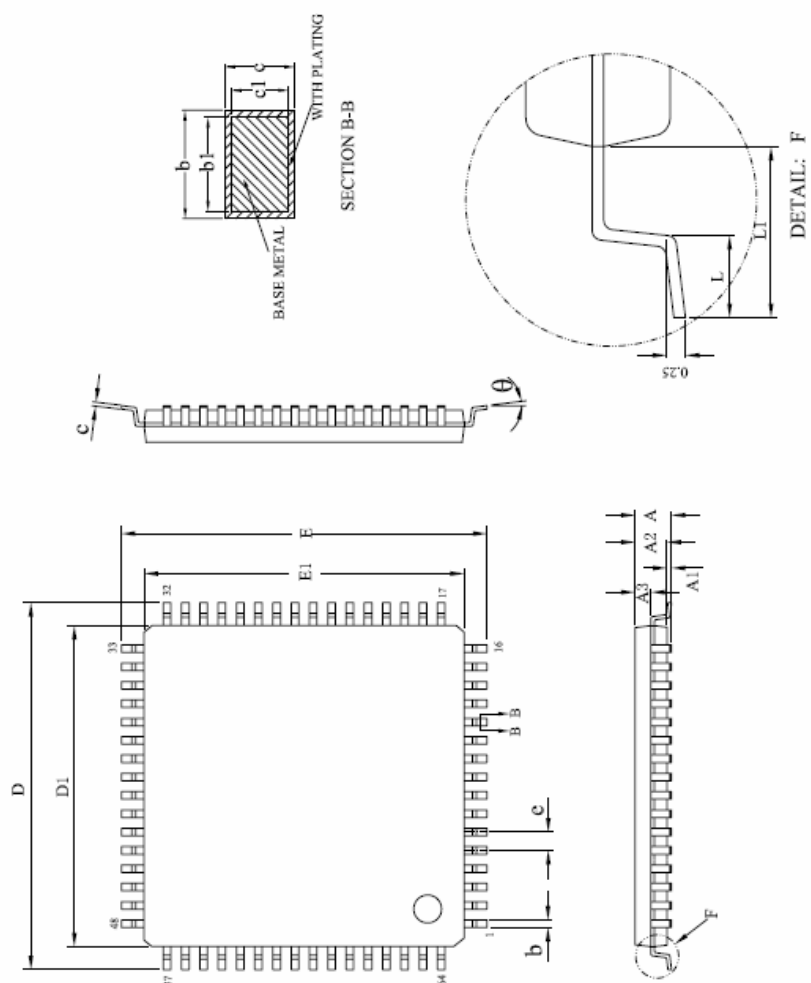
LQFP64-10x10mm Package Dimension Parameter
